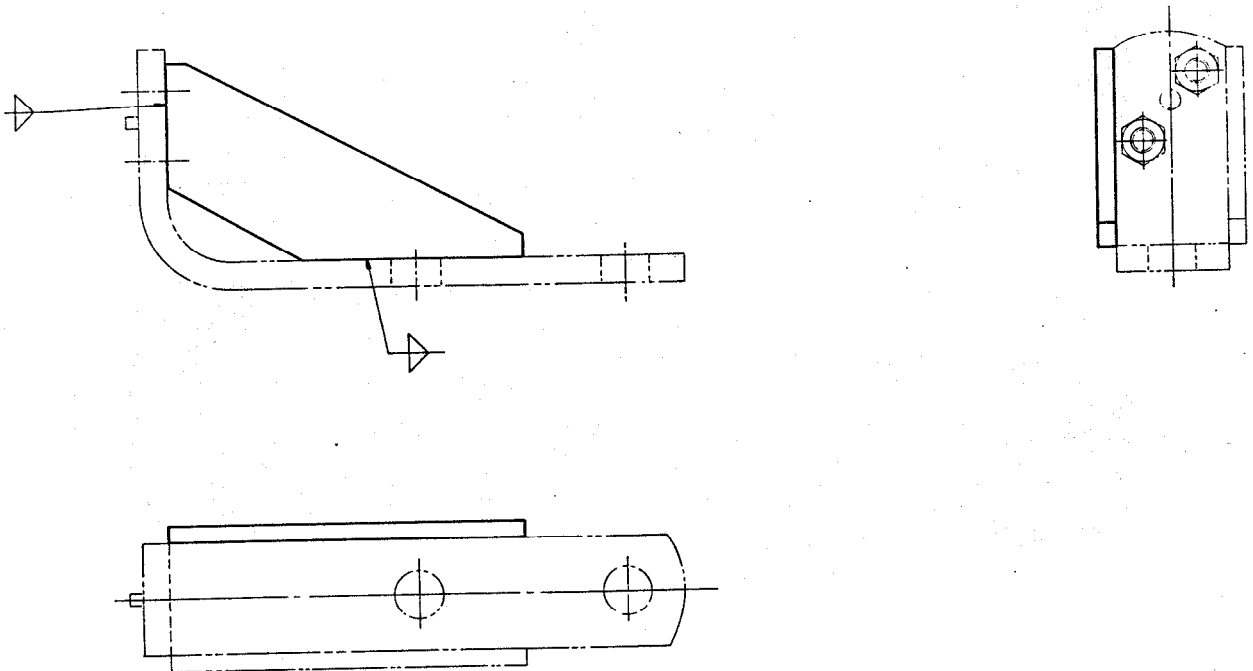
ASSEMBLY WELDING DETAILS
